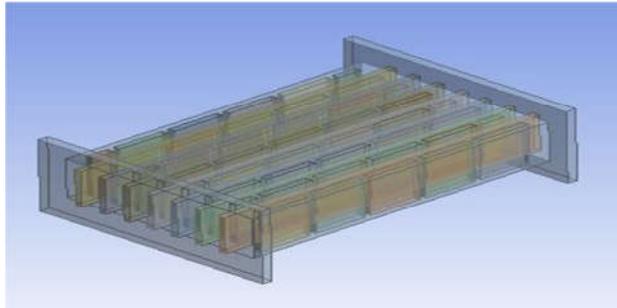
Fig shows Geometric Model of rectangular tube heat exchanger.
